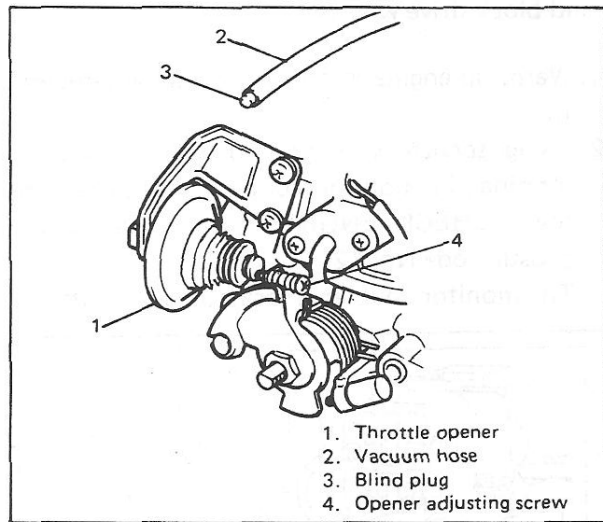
E-108 Checking and Adjusting Engine Speed For Opener
